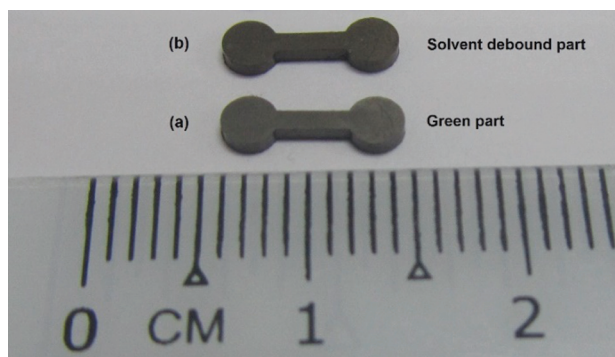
Defect-free microinjection moulded part (tensile bar specimen)
